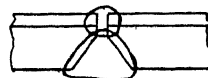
A. Recommended procedure for welding stainless clad 12 gauge and thinner.
